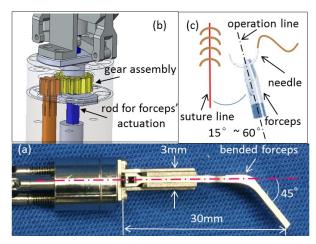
Forceps design. a, geometric dimensions of forceps; b, wrist design indicating major components; c, ideal suture posture.
